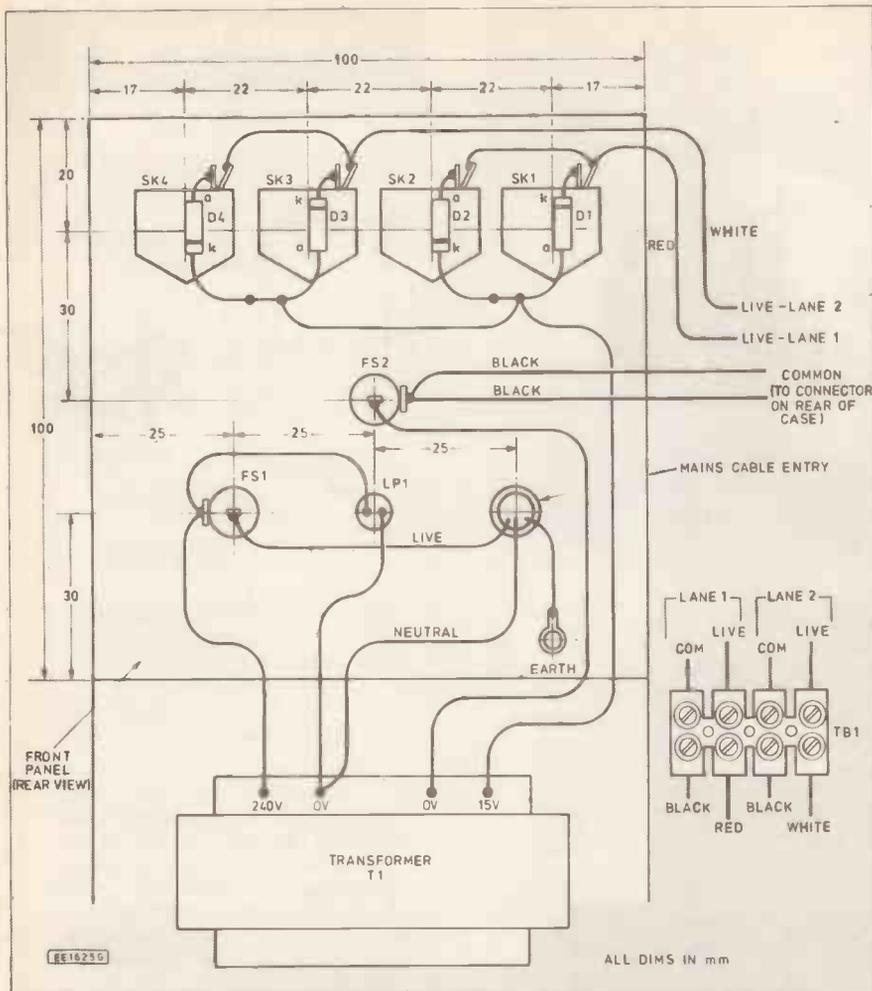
Front panel layout, drilling details and interwiring for the main power supply unit. The track connecting terminal block TB1 is mounted on the outside of the rear panel.
